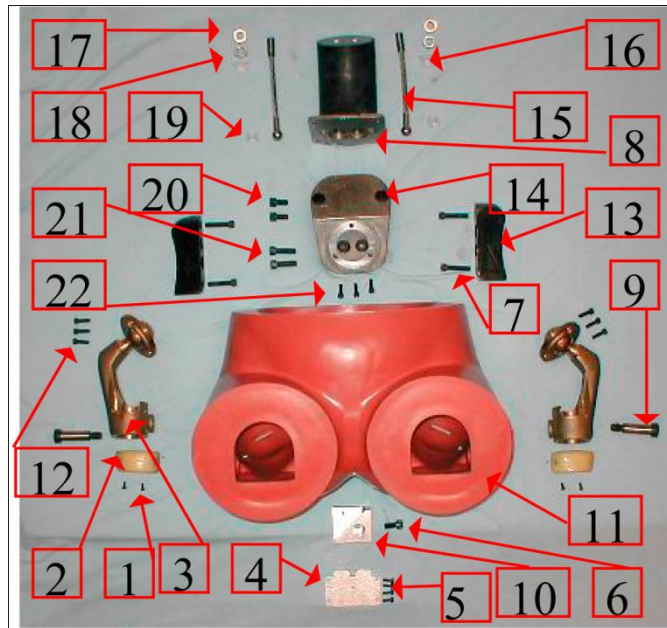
LOWER TORSO, EXPLODED VIEW
